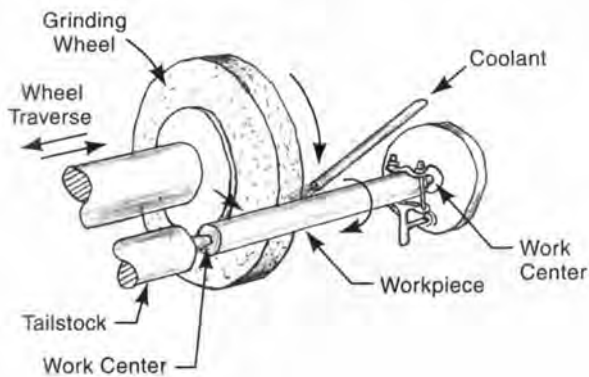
C1a Center-type grinding. Note that the grinding wheel rotates, has transverse motion across the whole length to be ground, and is fed into the workpiece as material is removed. The workpiece, held in centers, rotates against the grinding wheel.
